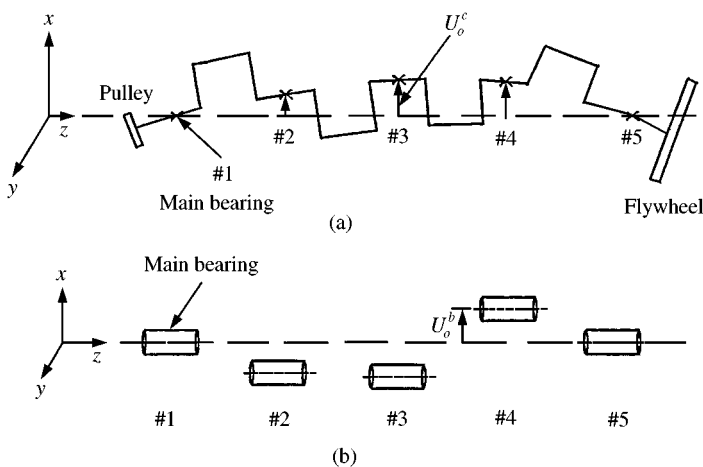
(a) Schematic of crankshaft "bent", (b) schematic of engine block misboring.
